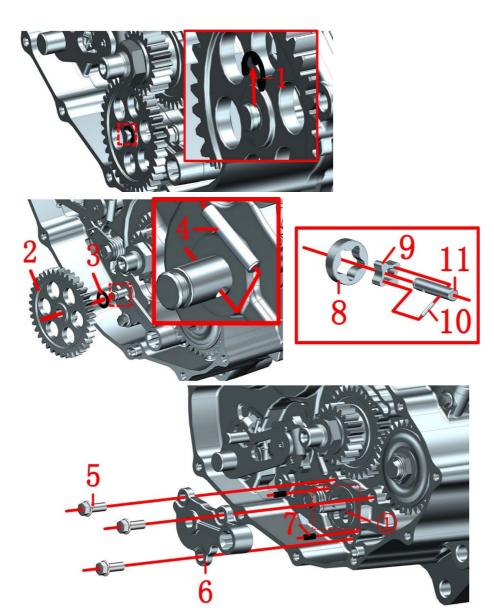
RI	GHT CRANKCASE	ZT158MJ oil pump assembly		Q
